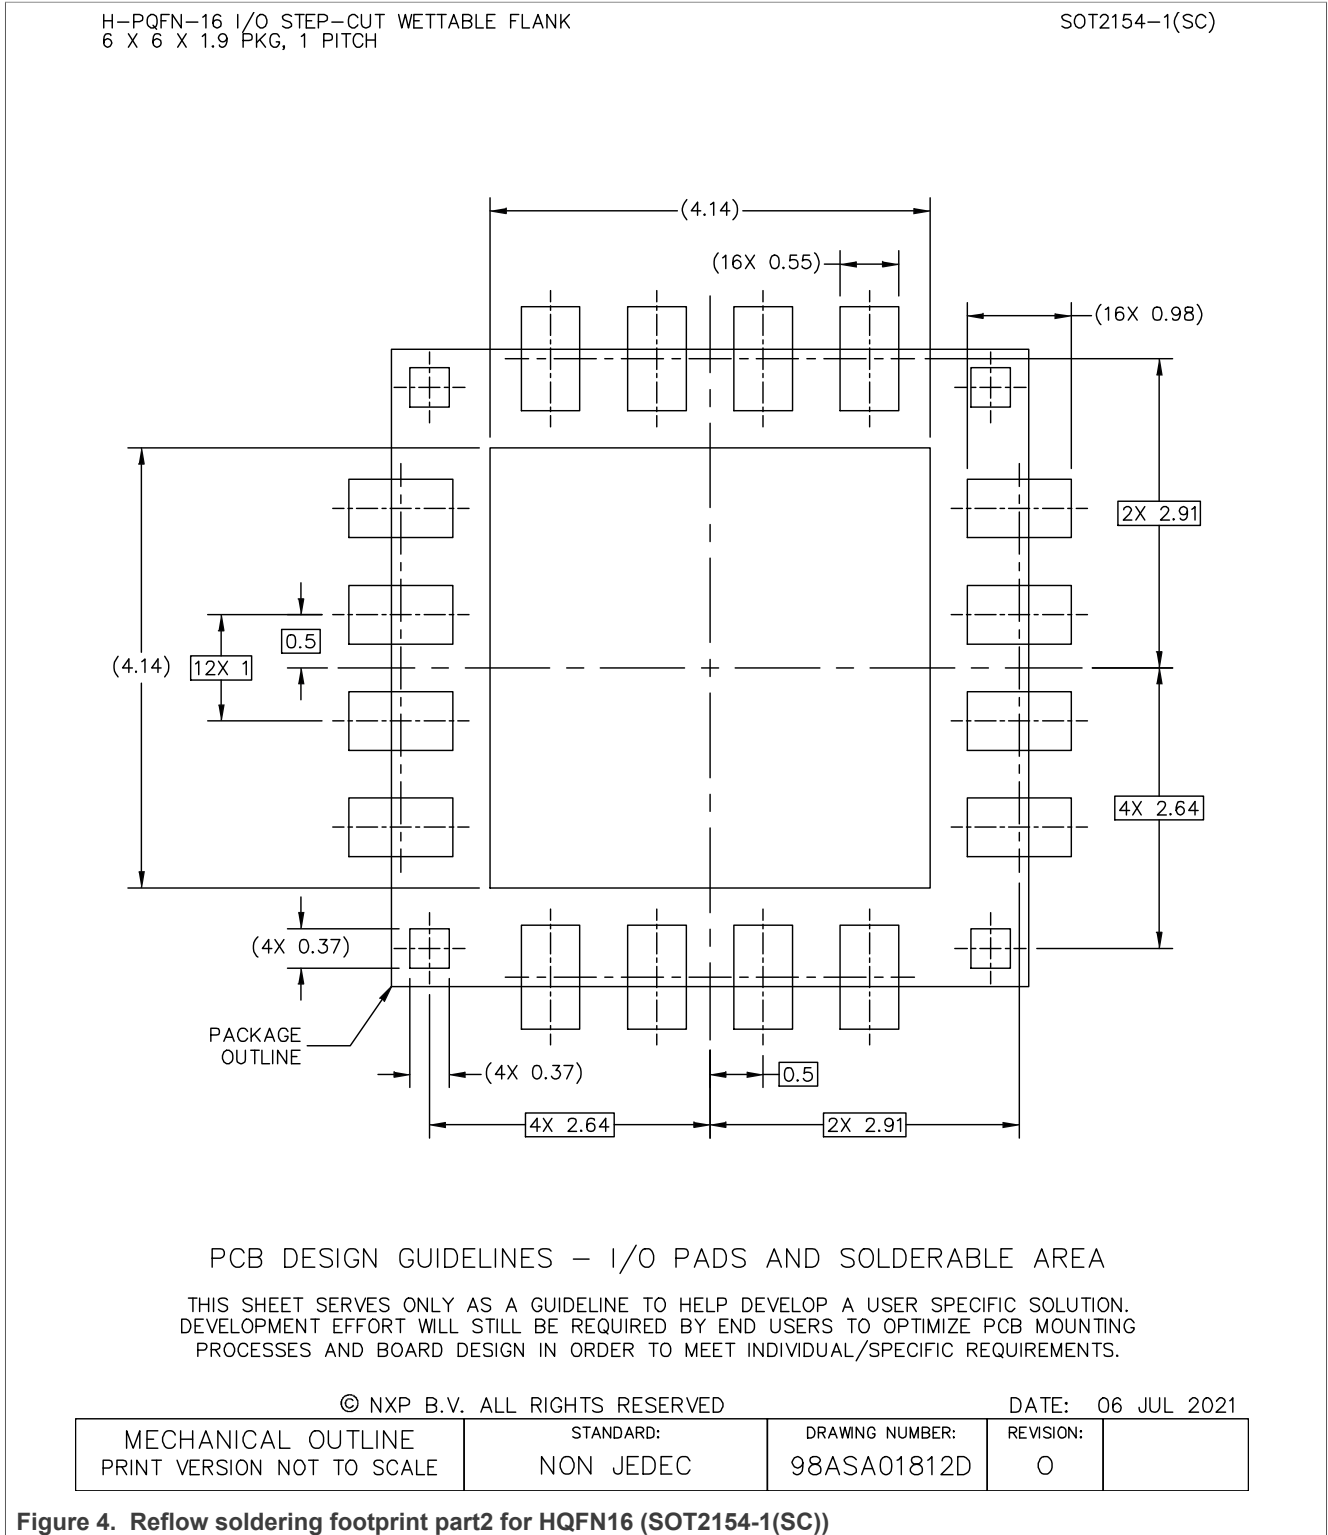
Reflow soldering footprint part2 for HQFN16 (SOT2154-1(SC))
